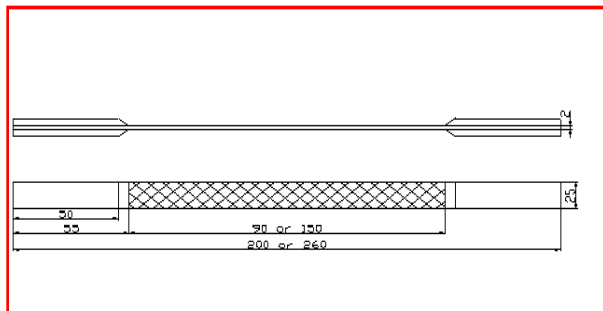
In plane Shear Test Specimen (ASTM D 3518)
